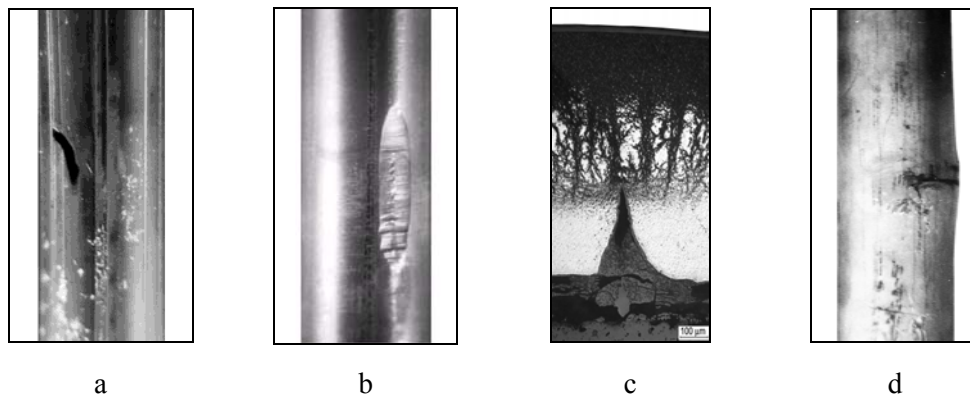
Defects of the irradiated WWER fuel rod claddings: a – debris-defect; b – fretting-wear; c – internal hydrogenation; d – superposition of the through crack and local change in diameter.
